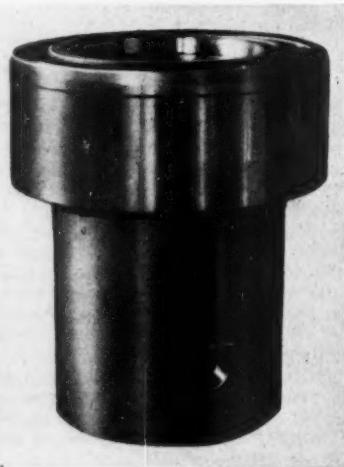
One of the largest types of Heller pressure-head. There is a range of this type of unit
